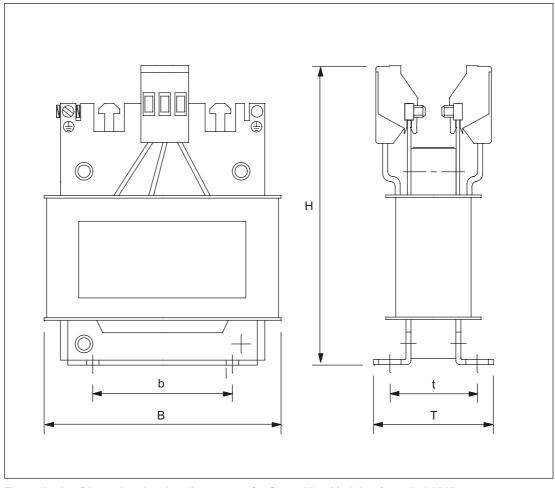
Dimension drawing: line reactor for Smart Line Modules (5 and 10 KW)
